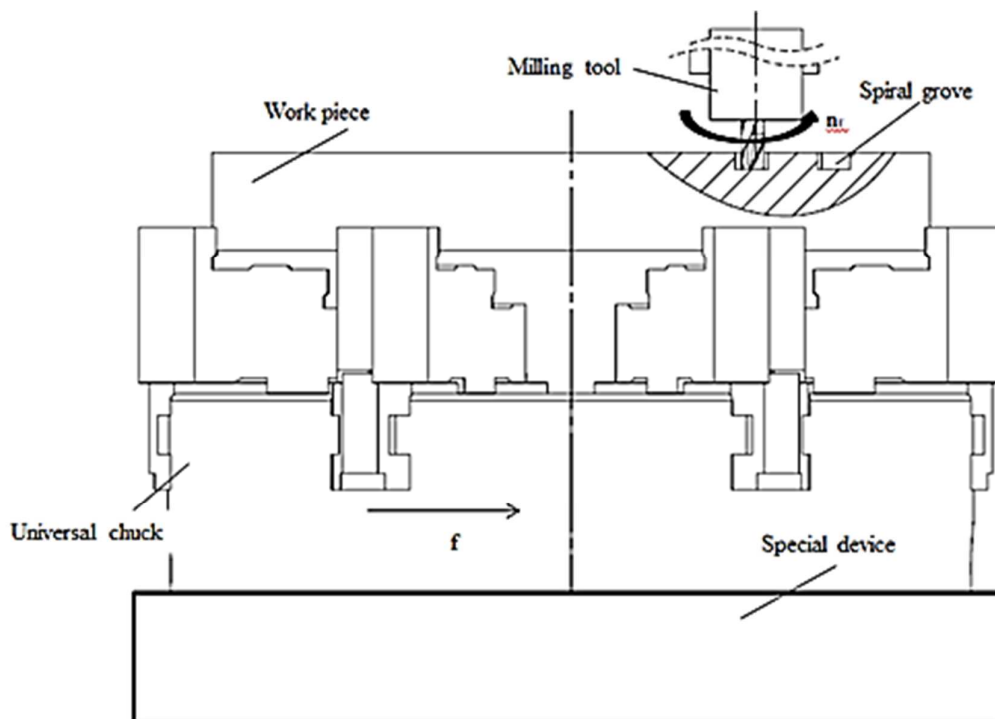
Machining a spiral groove on the flat surface of a disc-type workpiece using a device with a finger milling tool on a vertical milling machine.
